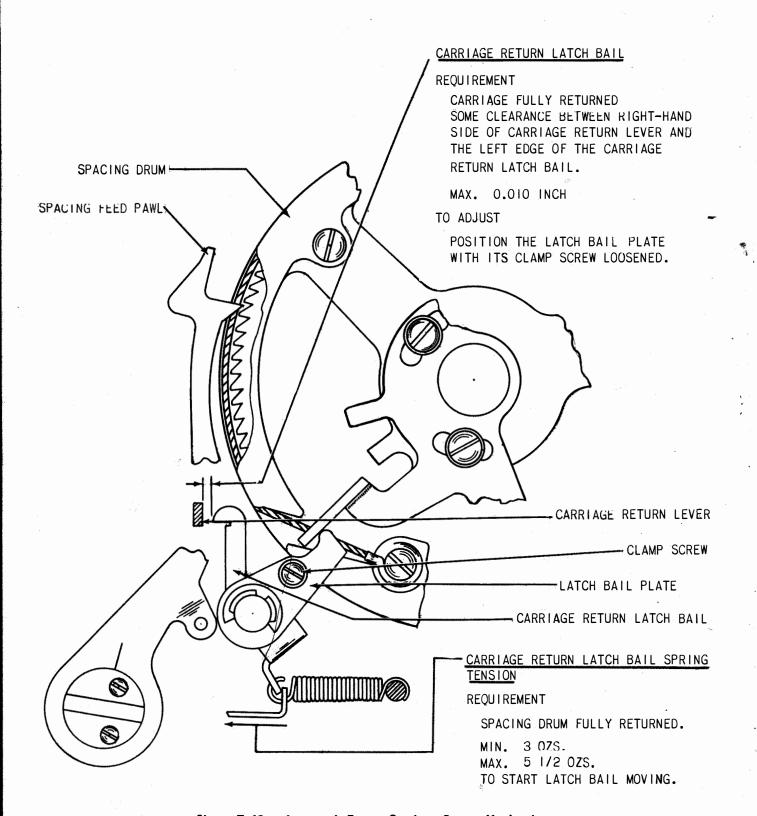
Automatic Typer, Carriage Return Mechanism
